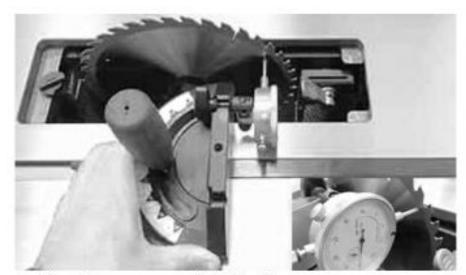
Blade/Table alignment with mitre gauge and dial indicator.
